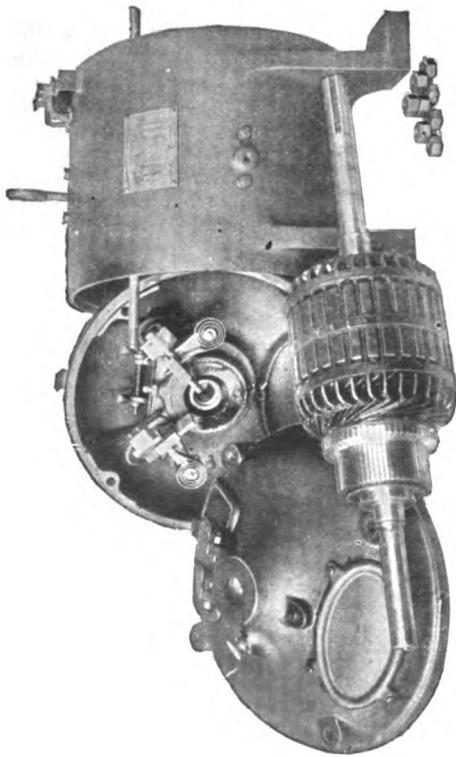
WESTINGHOUSE DUST-PROOF MOTOR. PARTS EXPOSED.
